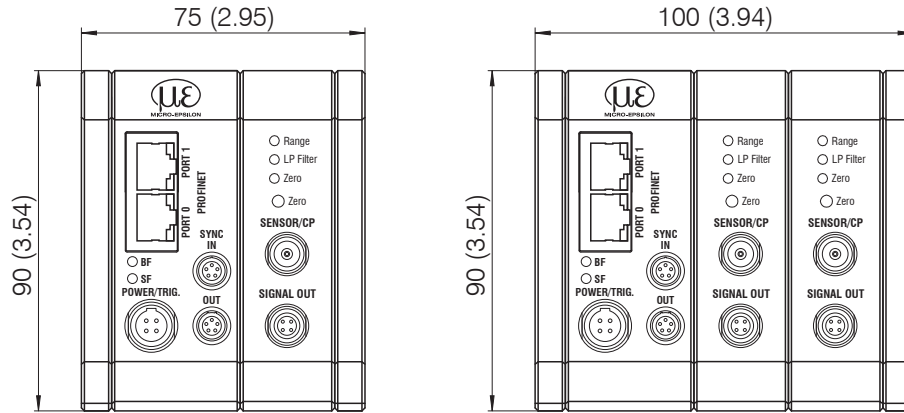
Dimensional drawing of controller with one or two demodulator modules
